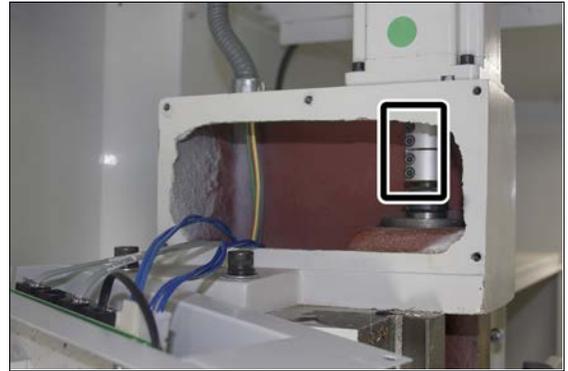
Z-axis motor secured to the Z-axis motor coupler with set screws pointing toward the left side of the machine.
